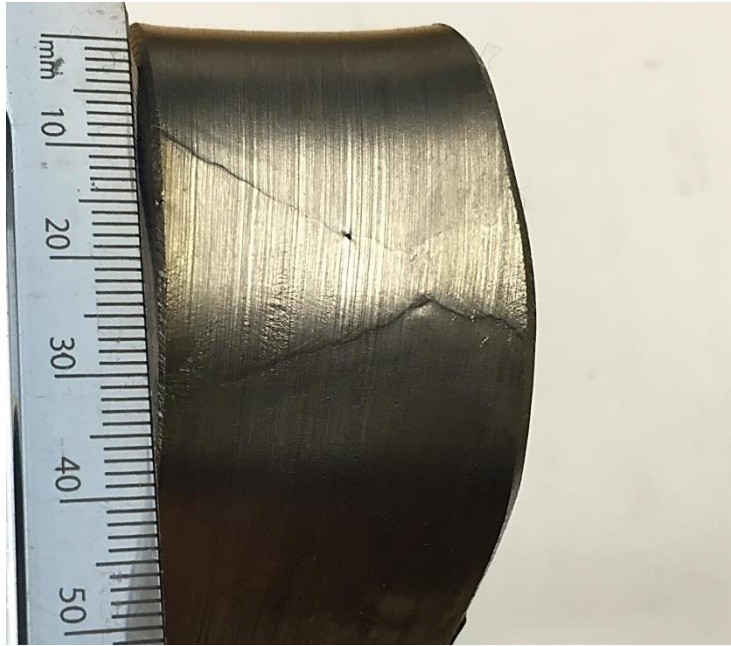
Sample 1 side bend test, face view. Small tear 5 mm away from the root (Heat treated for 579h at 635°C prior to welding and a 672h PWHT at 635°C).
